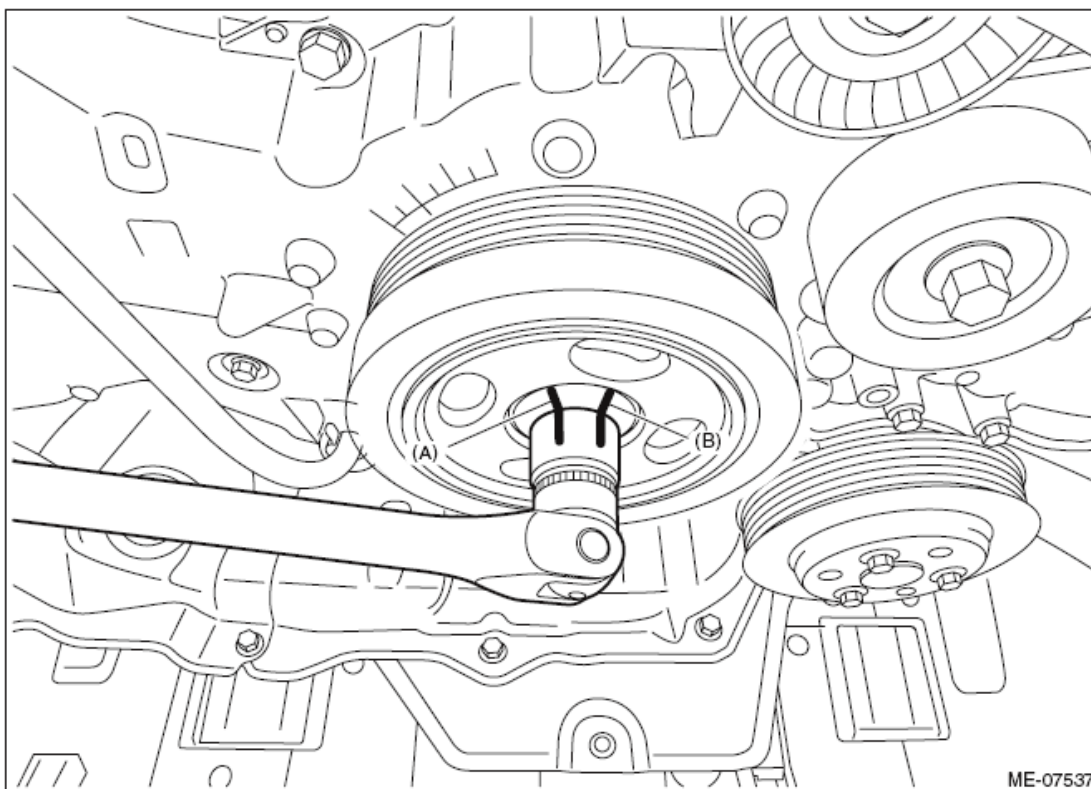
Drawing Crank Pulley Bolt Reference Lines
